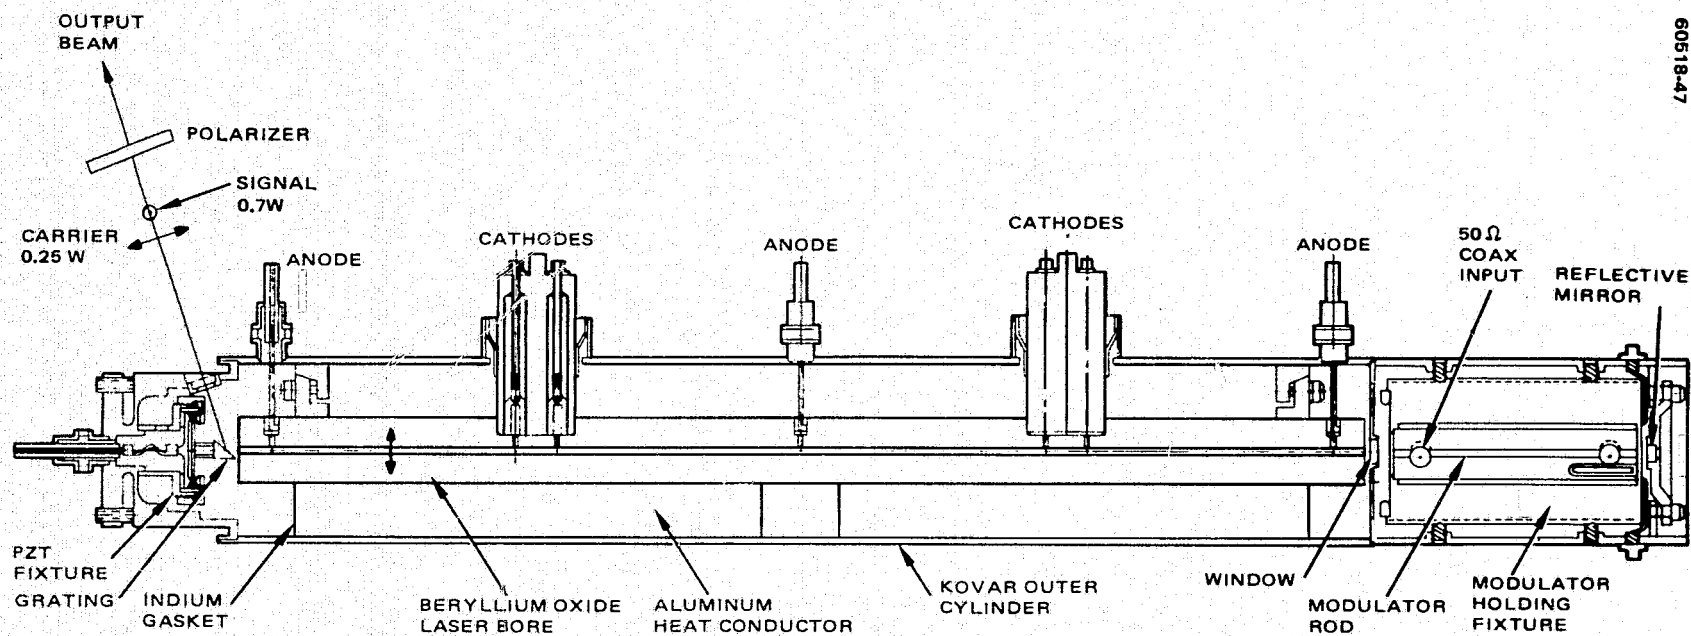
SECTION DRAWING OF LASER TRANSMITTER
